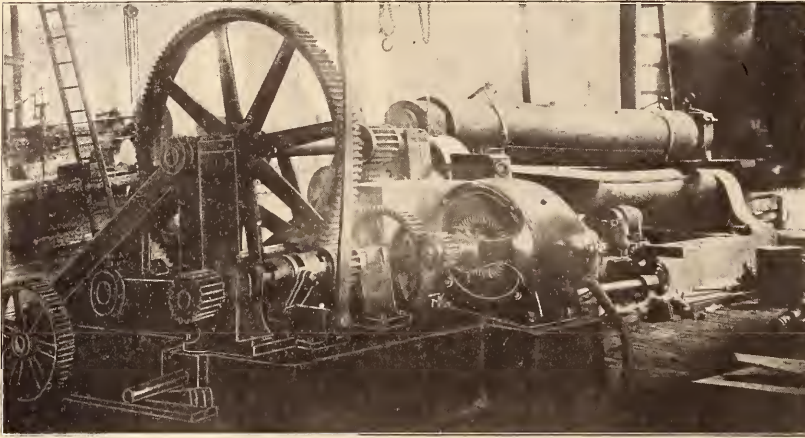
SHEET ROLLS DRIVEN BY INDIVIDUAL MOTOR,
